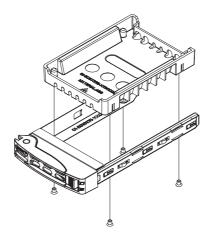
Installing a Hard Drive into the Hard Drive Carrier
